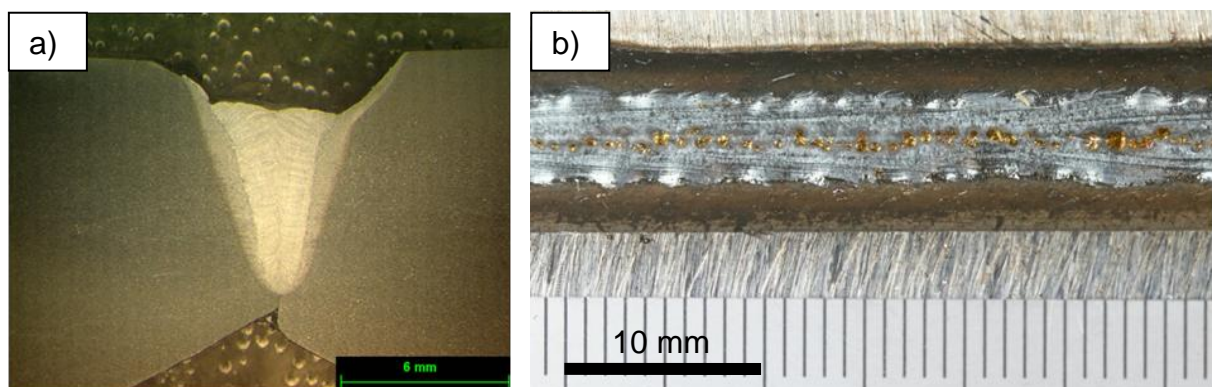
Butt-weld on misaligned X-prep configuration at a travel speed of 5 m min^{-1} at wire feed speed of $2 \times 20 \text{ m min}^{-1}$; a) macrograph; b) top bead.
